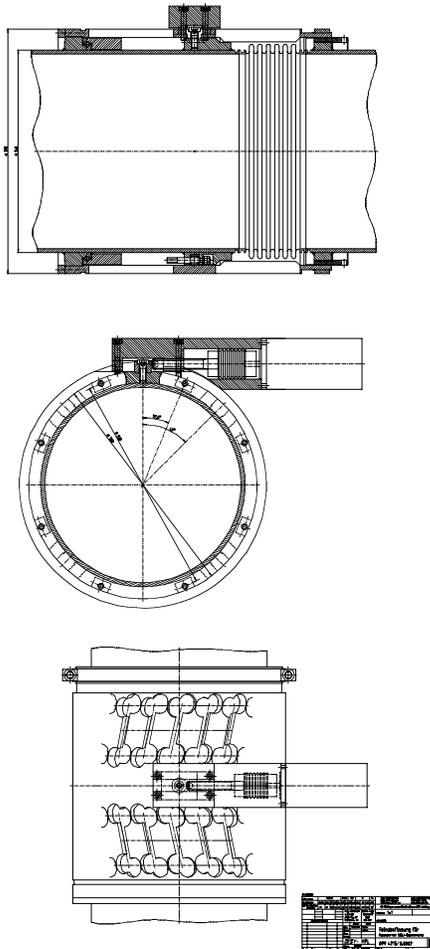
Drawings of tuner: Axial section, cross section and top view (top to bottom)
